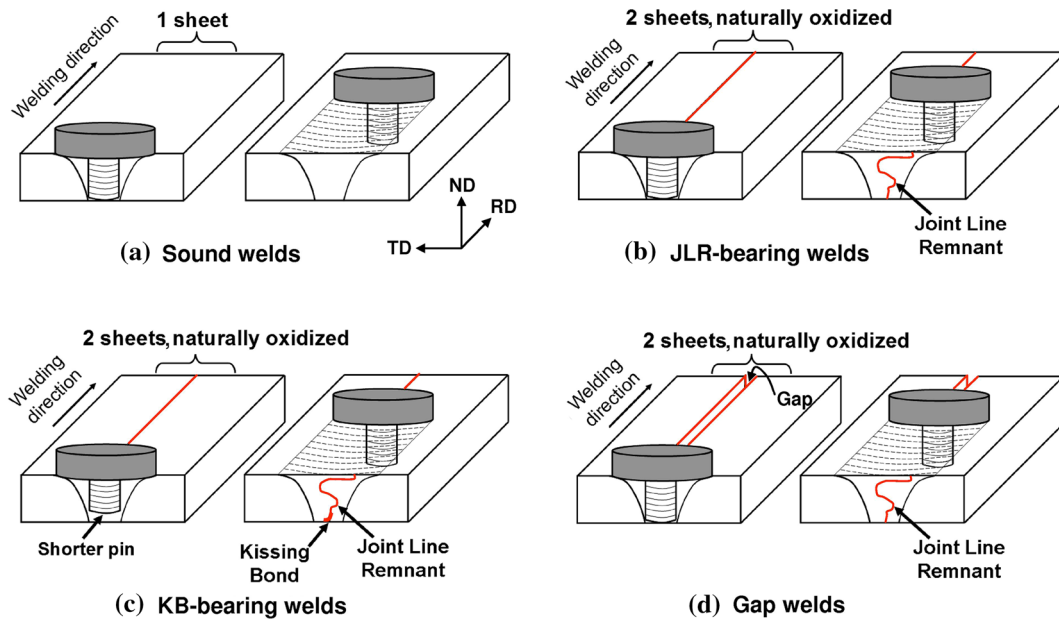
Schematic drawing of (a) “sound” welds, (b) welds bearing a joint line remnant, (c) welds bearing a kissing bond, (d) welds with a gap left between the parent sheets.
